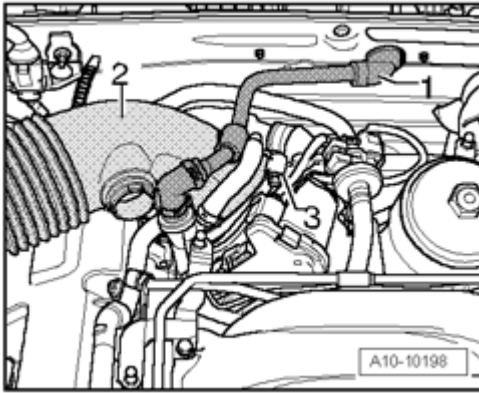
Identifying Vacuum Hose, Intake Hose & Clamp
